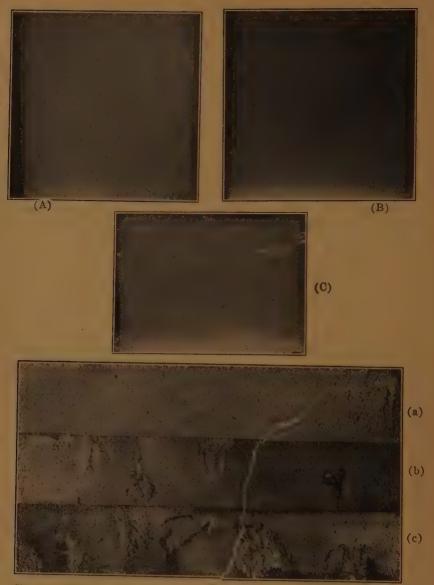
Radiographic examination of test specimens and the corresponding fracture produced in fatigue tests. Gun steel similar to that shown in Fig. 1 was used.
